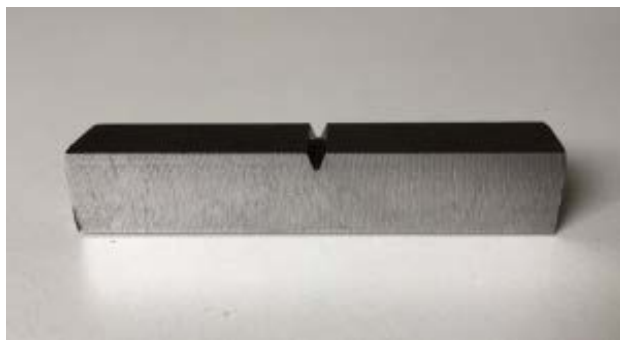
Charpy impact test specimen machined from 55Cr3 according to ASTM E23-16b
